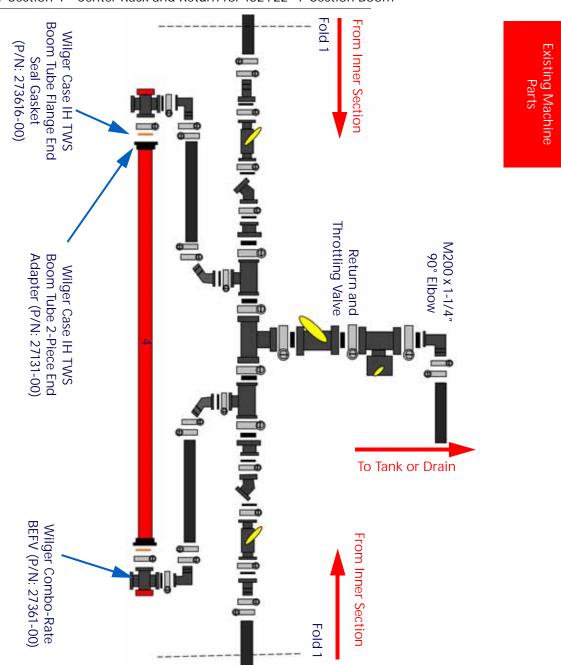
Plumbing Example for Center Boom Section for 5-Section and 7-Section Booms
